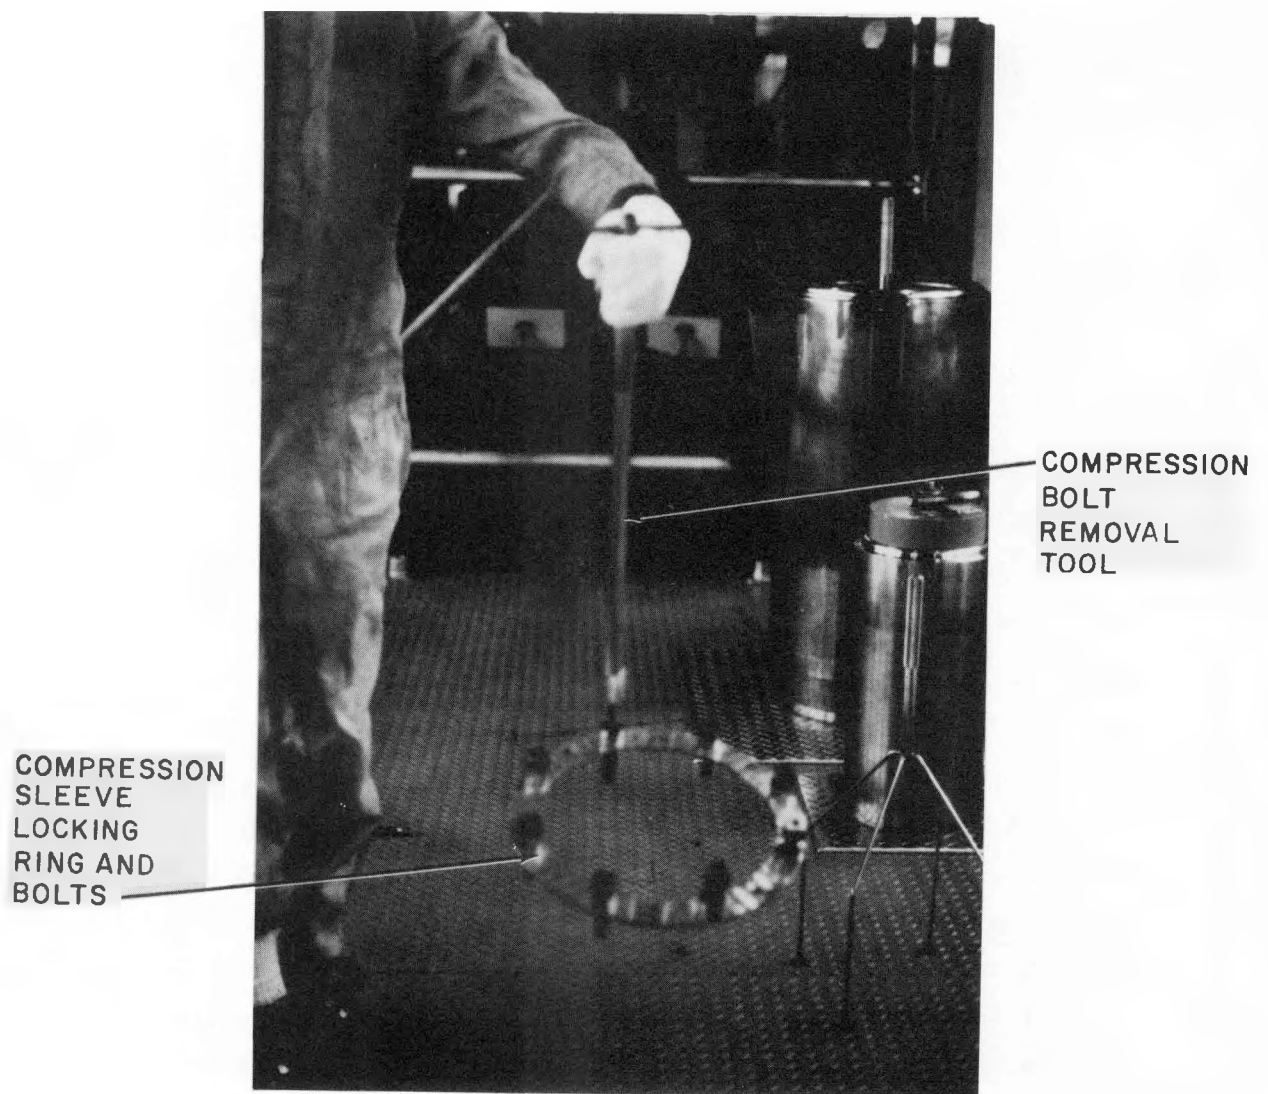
Compression Sleeve Bolt Removal Tool Demonstration
